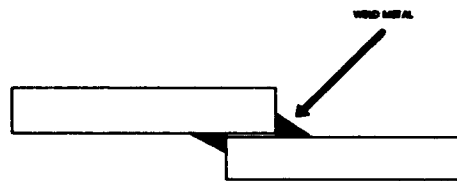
Avoid exposed crevices. One remedy is to apply weld metal to the entrance of all crevices.
